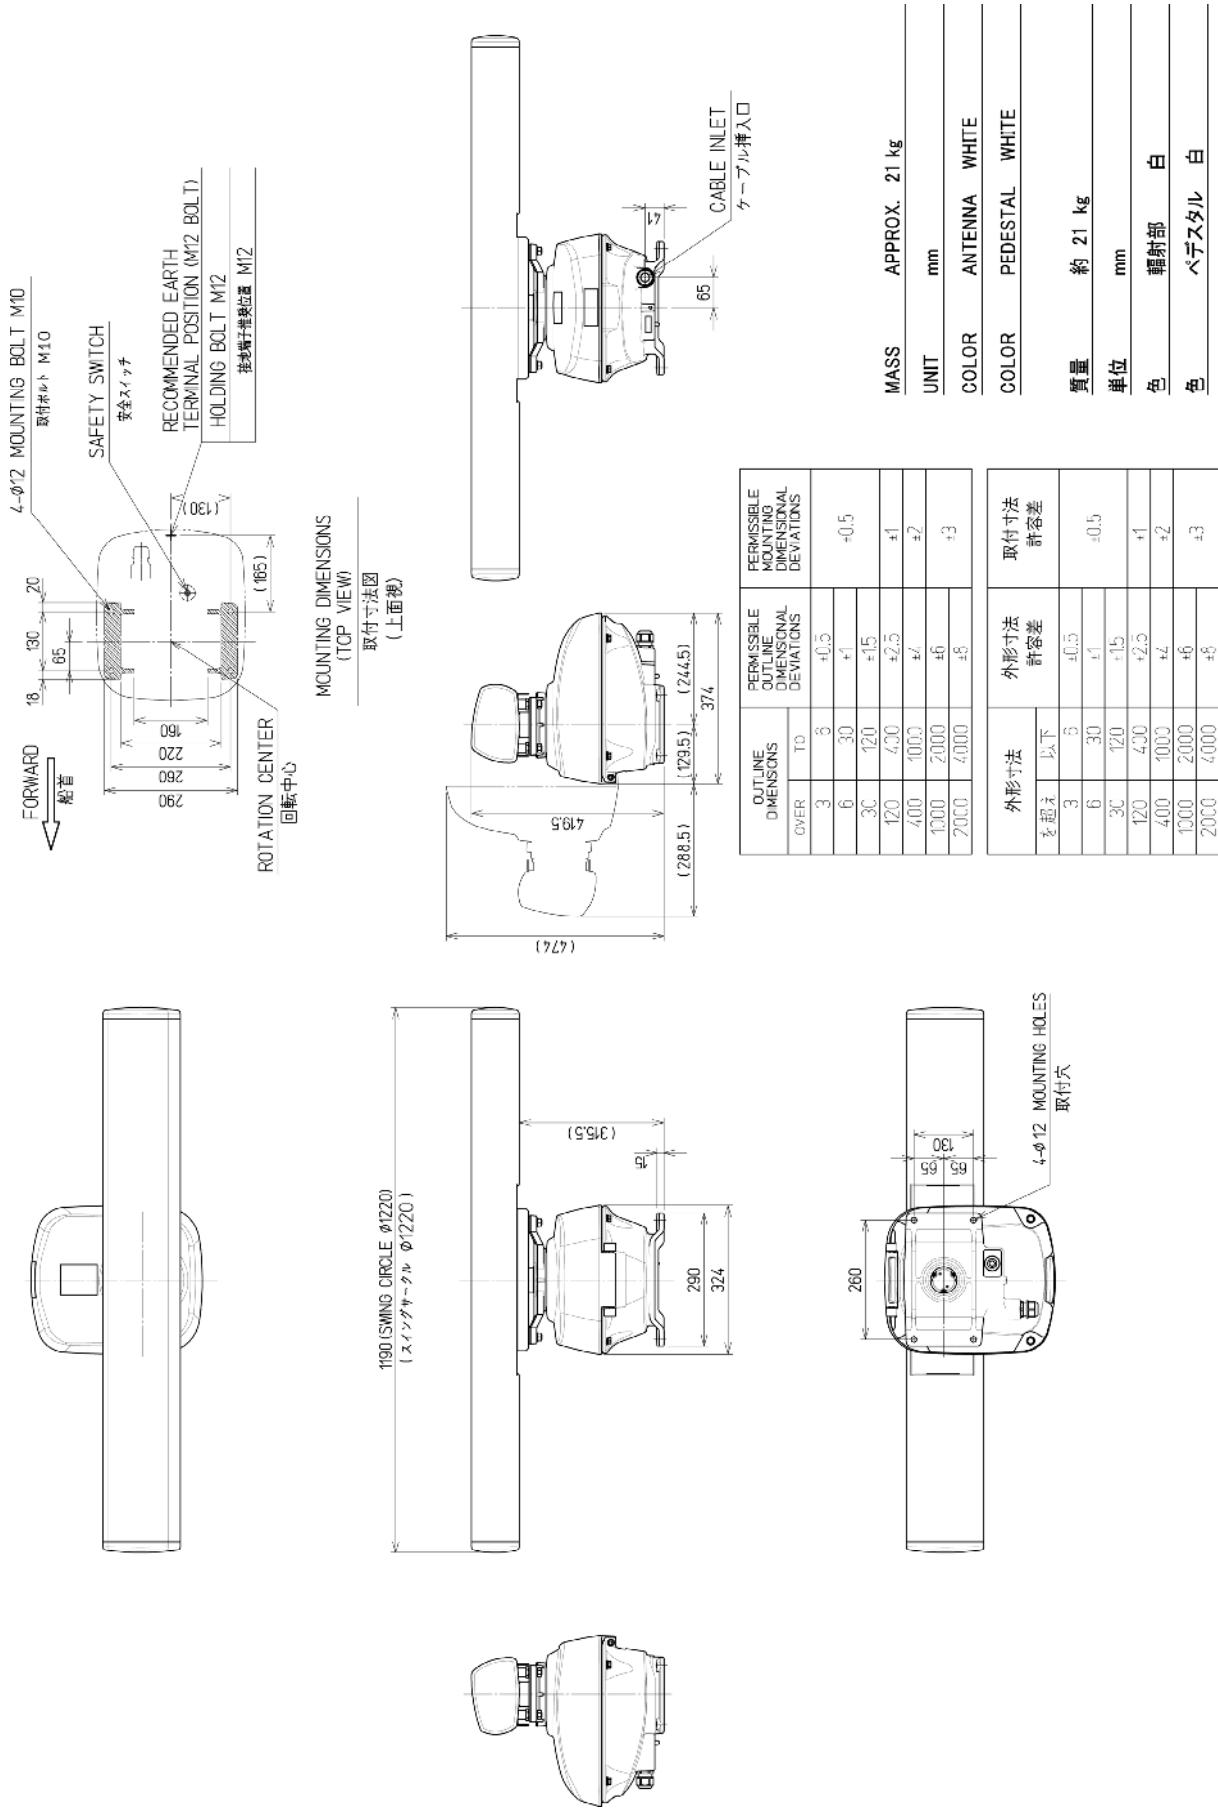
Exterior Drawing of Scanner Unit, Type NKE-2103-4/4HS
